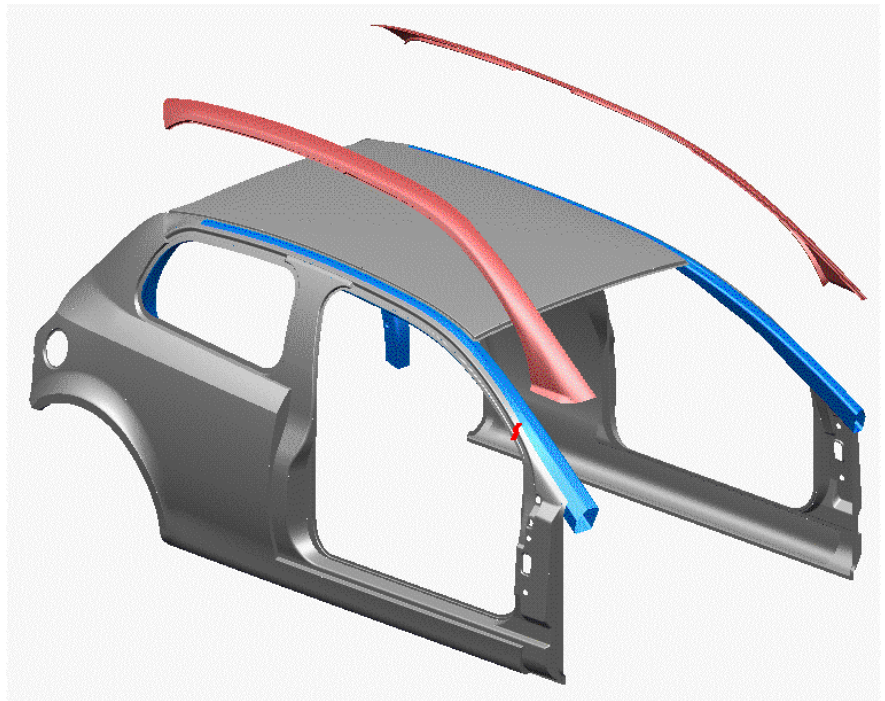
View of C-Class roof side rail appliques exposing the body side outer laser welded joints and roof side rail joints.
